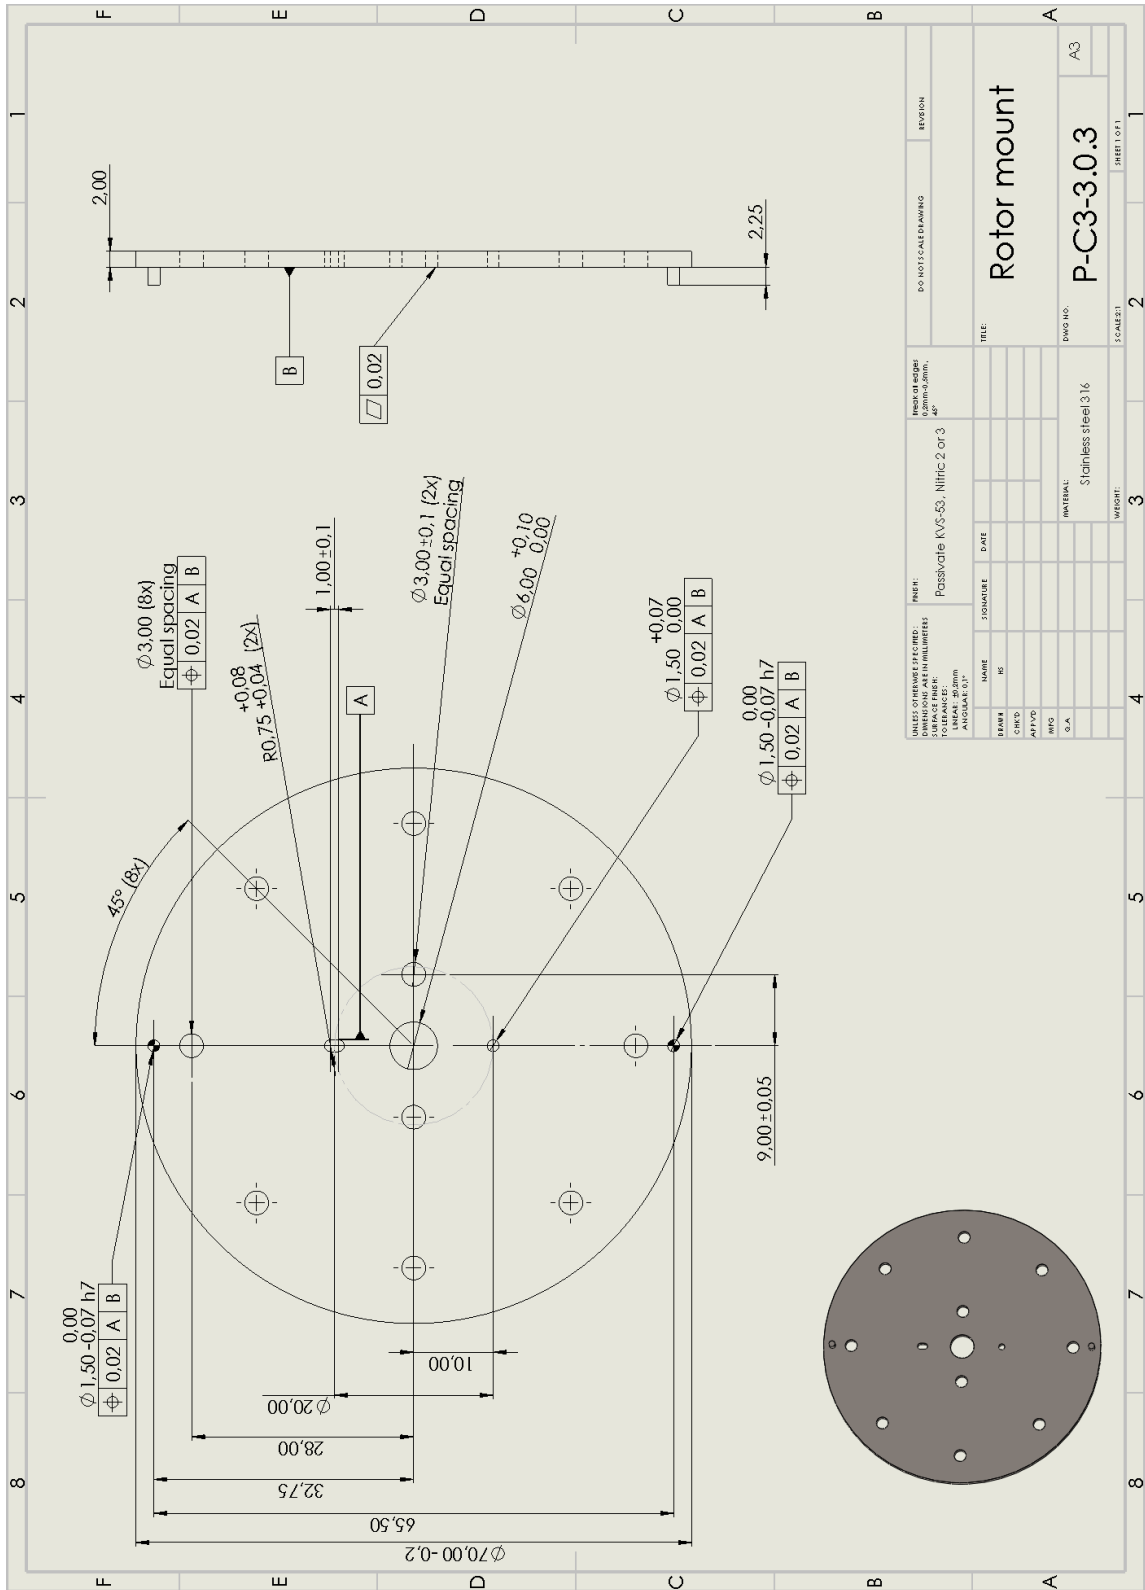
Rotor Mount measures and tolerances, 2D
